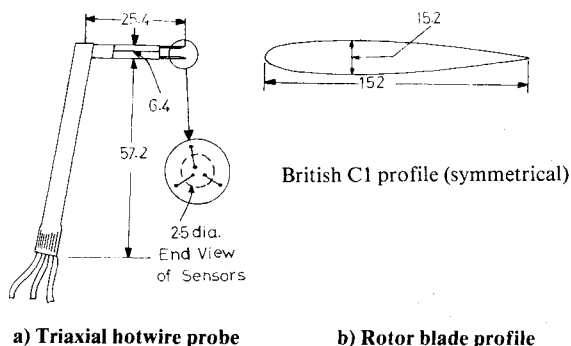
Rotor blade profile and hot-wire probe used (dimensions in millimeters).
